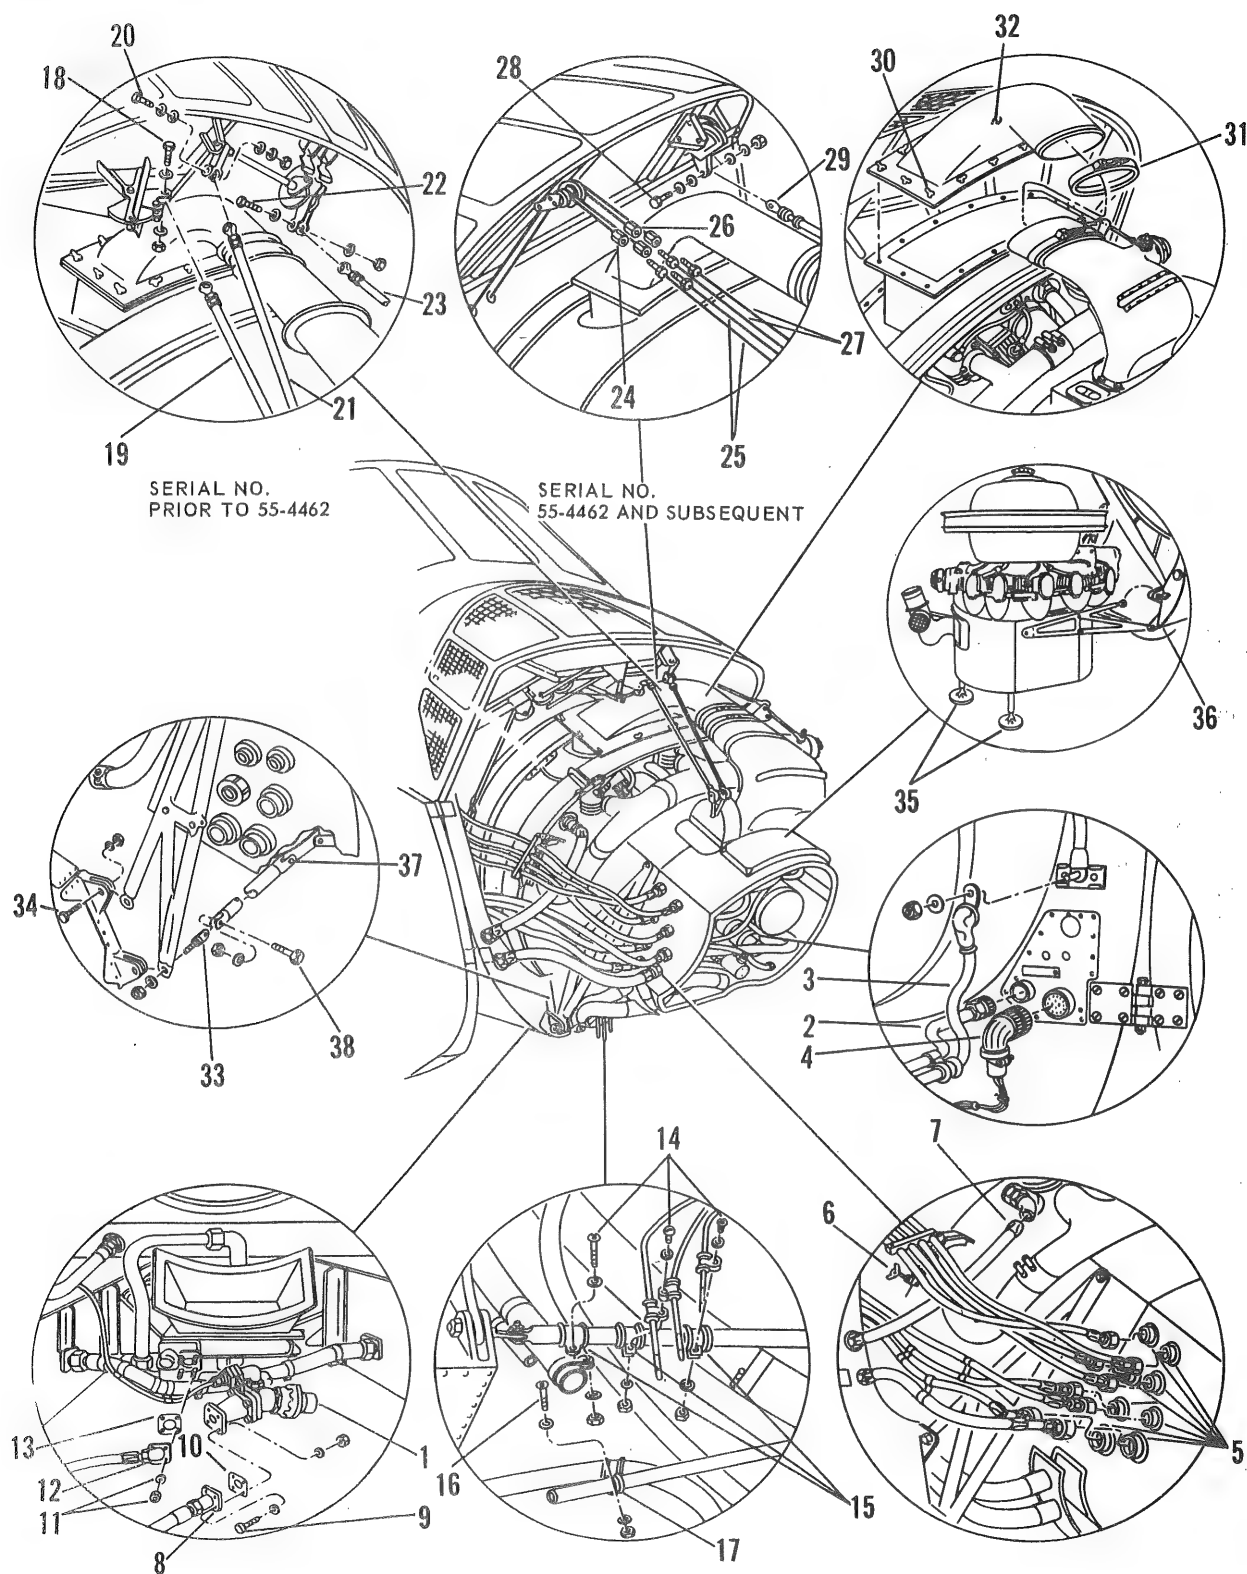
Power Package Removal - Installation (Sheet 1 of 2)
